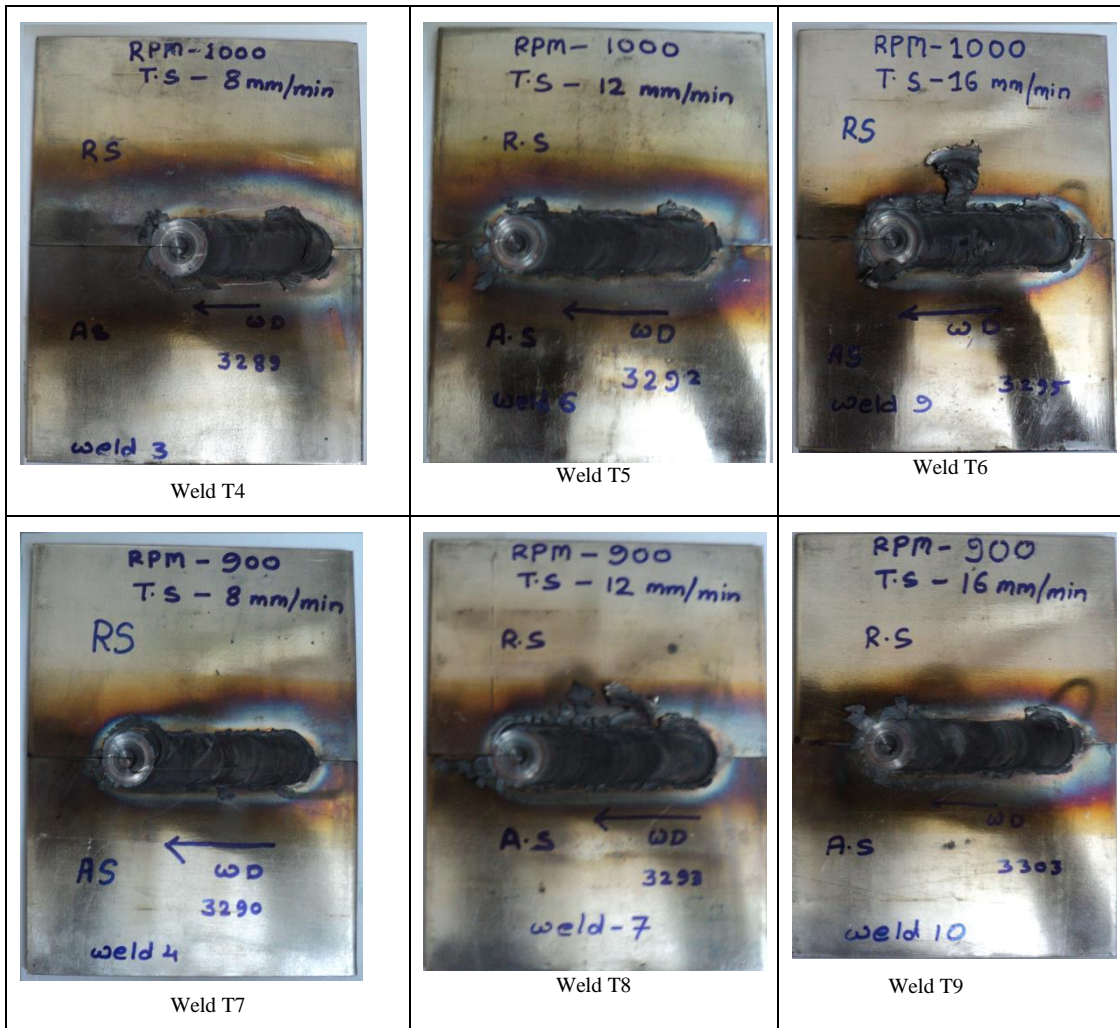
Photographs of Friction Stir Welded AISI-316L plates
